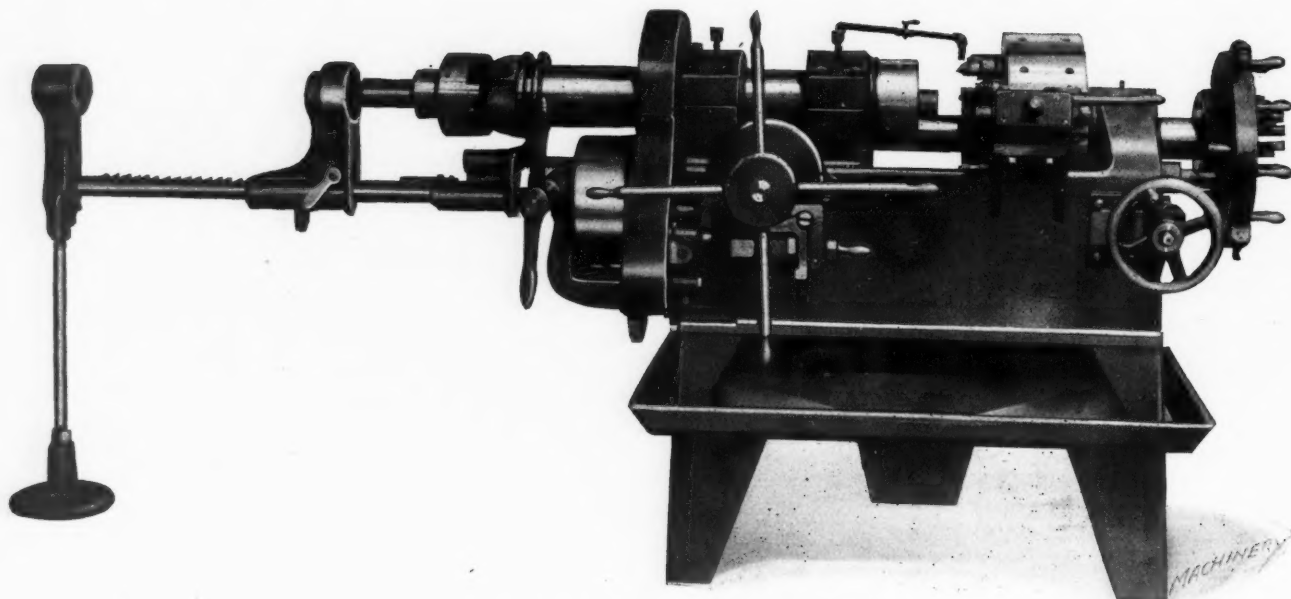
Type H Semi-automatic Fuse Socket Lathe
